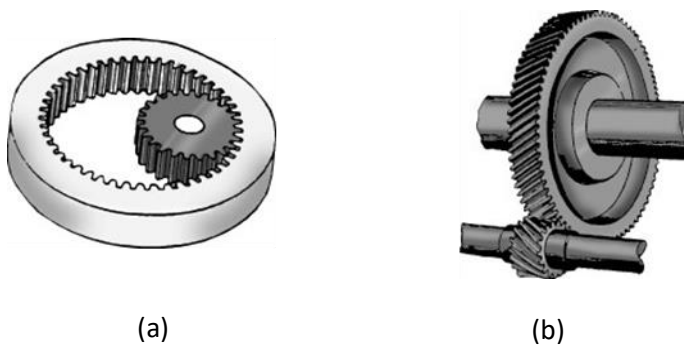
(a) Internal Spur Gear (b) Helical Gear
